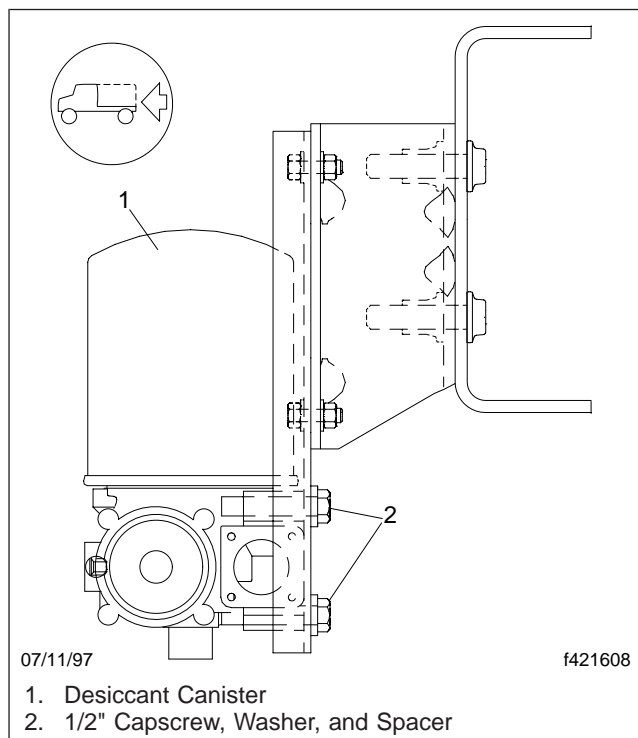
, Air Dryer Installation (outboard rail mounting shown)
